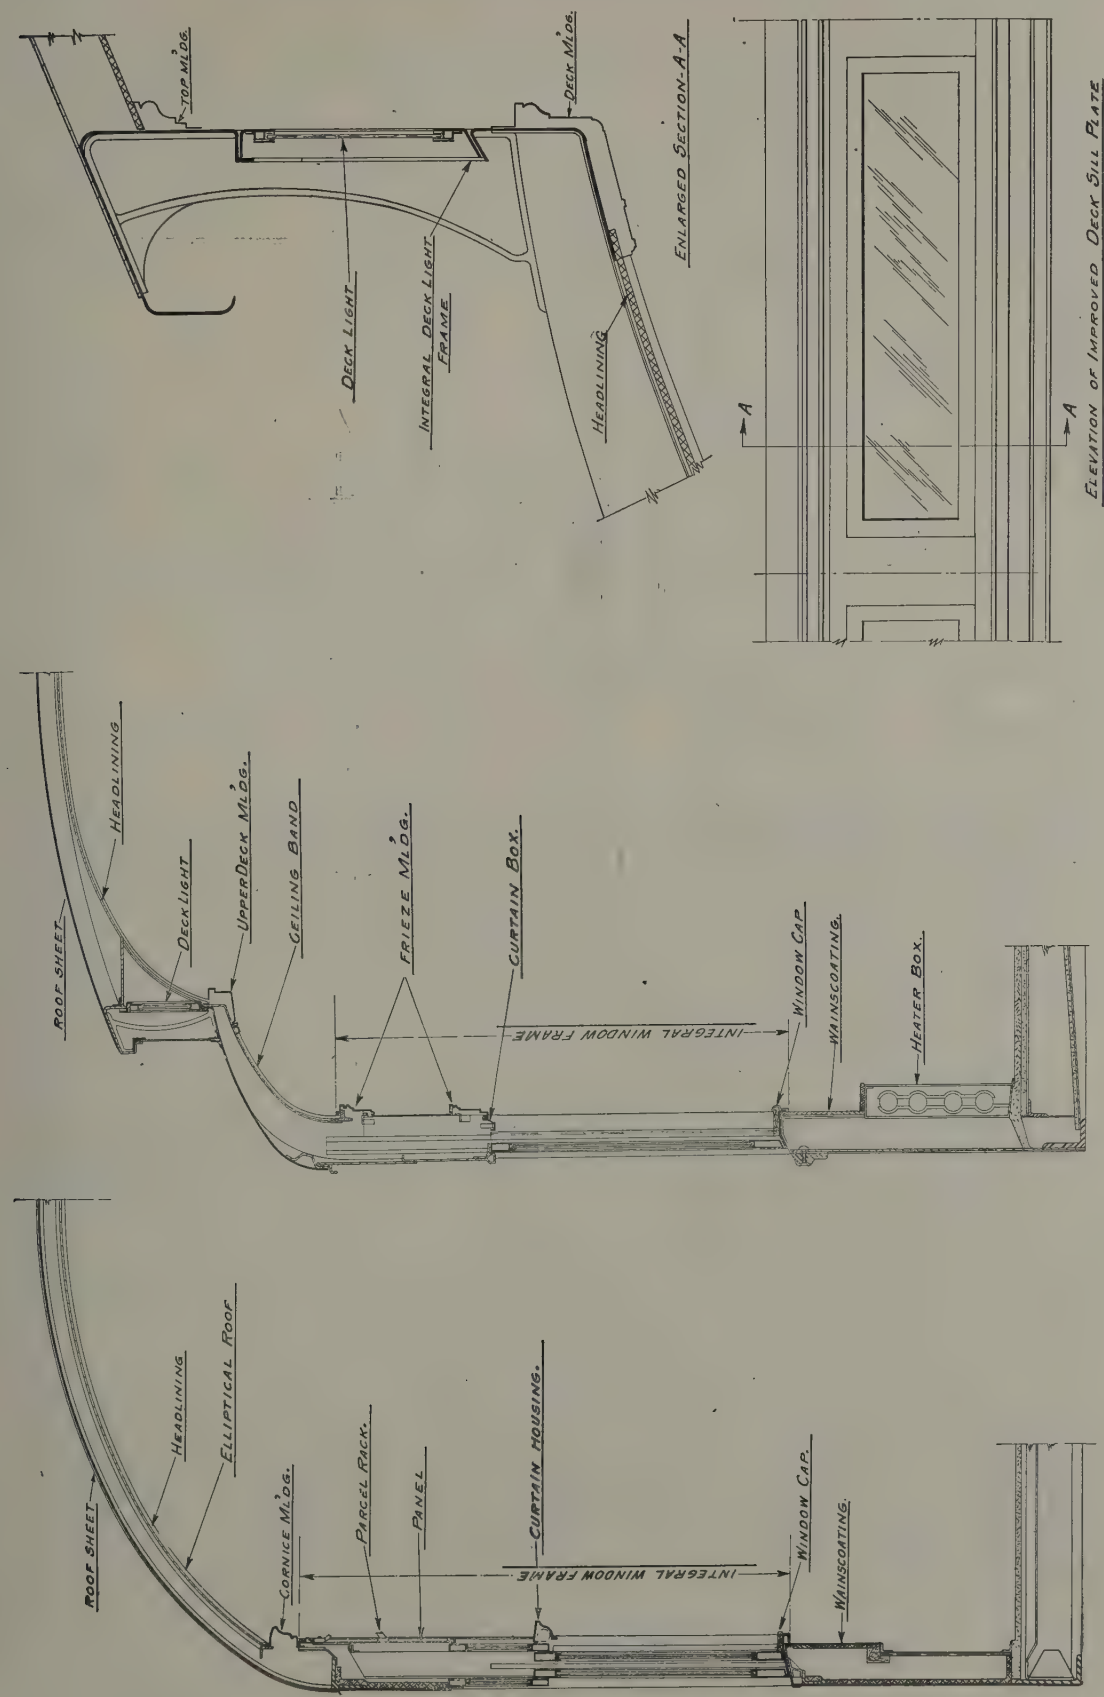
Interior Finish for Steel Passenger Train Cars. The Hale & Kilburn Company.
